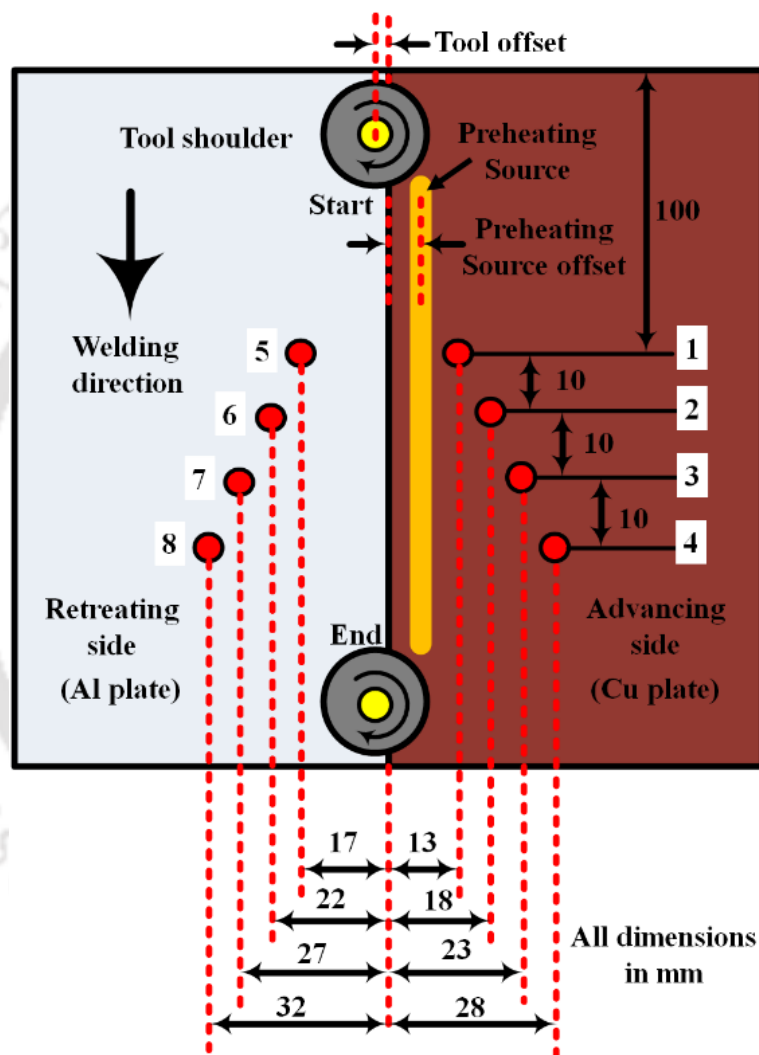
Layout of thermocouple points during welding for dissimilar material joint.
